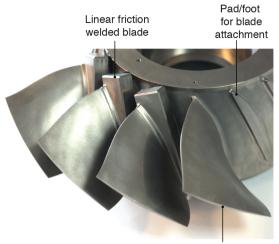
Illustration of a modern linear friction welding system for production of jet engine bladed disks (blisks). *Source:* After D. Adams, MTI Welding.
